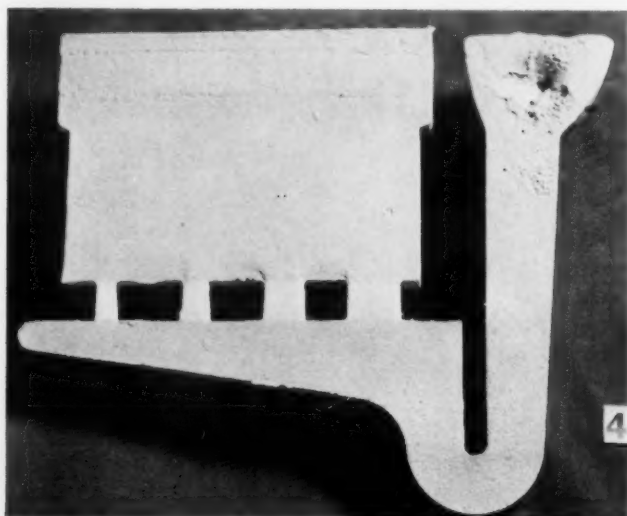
Experimental casting made of low-carbon steel in a forsterite shell mold, poured at 2900 F.
